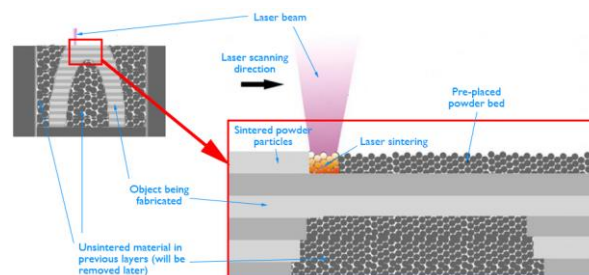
Selective Laser Sintering (SLS) process. ©Quill & Pad
